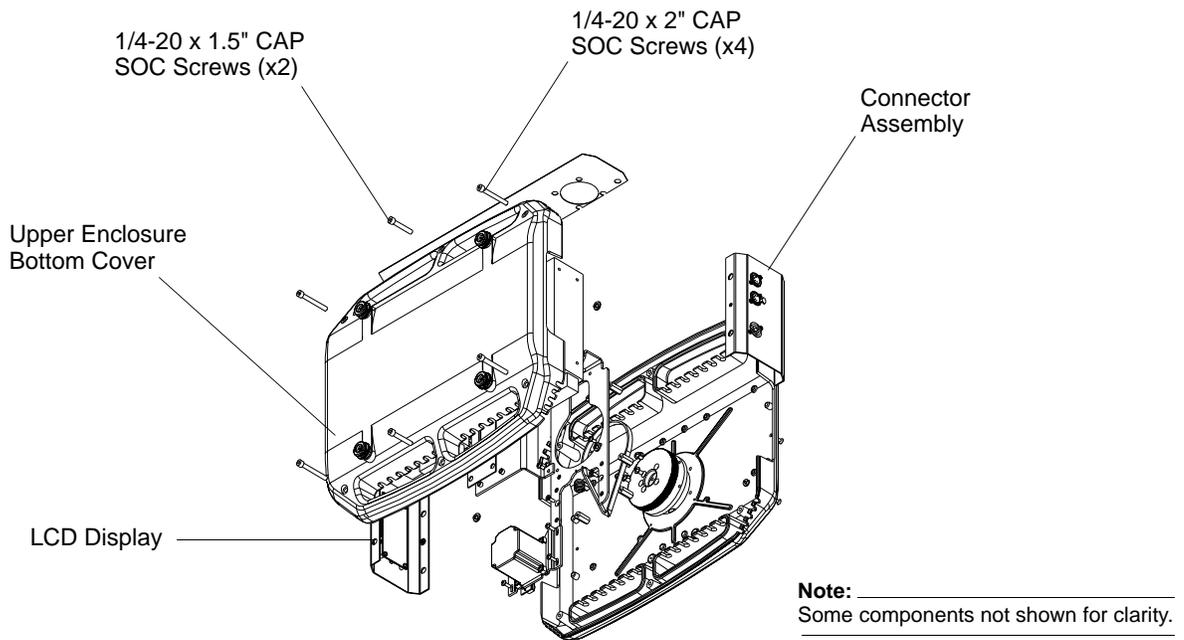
VLX Wash Upper Enclosure LCD Display Assembly
